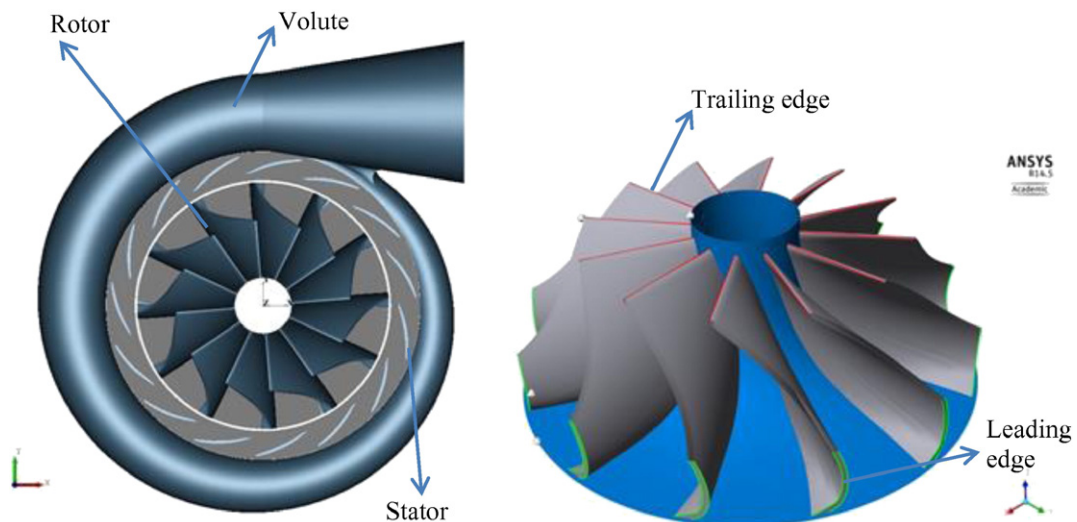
Turbine main parts from z-axis view (left), leading and trailing edges of rotor blades (right).
